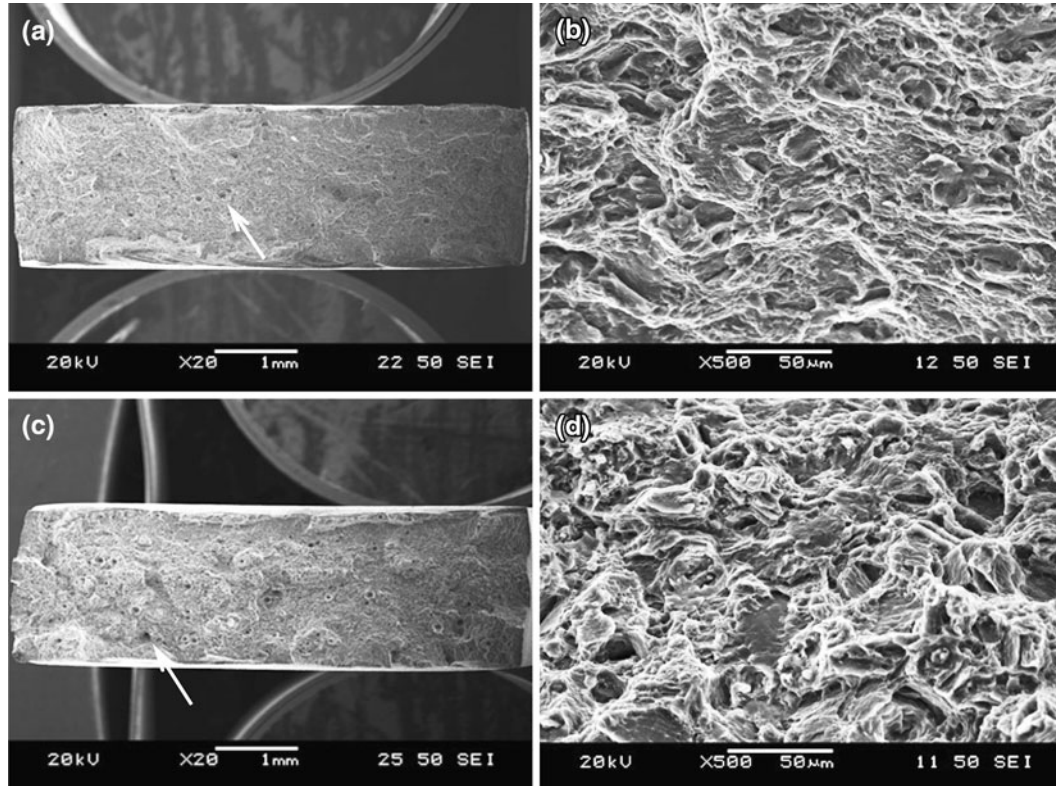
Typical SEM images showing the fracture surfaces after tensile testing at a strain rate of $1 \times 10^{-4} \text{ s}^{-1}$, (a) overall view of the entire fracture surface and (b) magnified view at a higher magnification of the FLW joint at a welding speed of 50 mm/s, (c) overall view of the entire fracture surface, and (d) magnified view at a higher magnification of the FLW joint at a welding speed of 100 mm/s.
